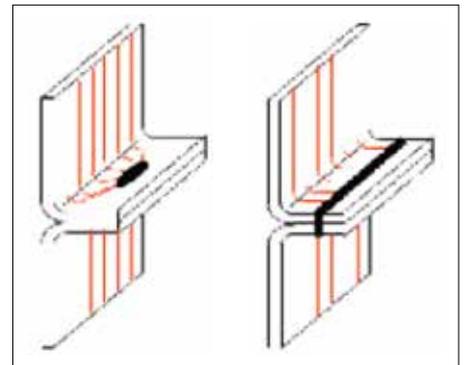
Flow of forces within a weld, comparing (left) spot resistance welding with (right) laser stitch welding. Laser stitches are programmable and can be of any shape
